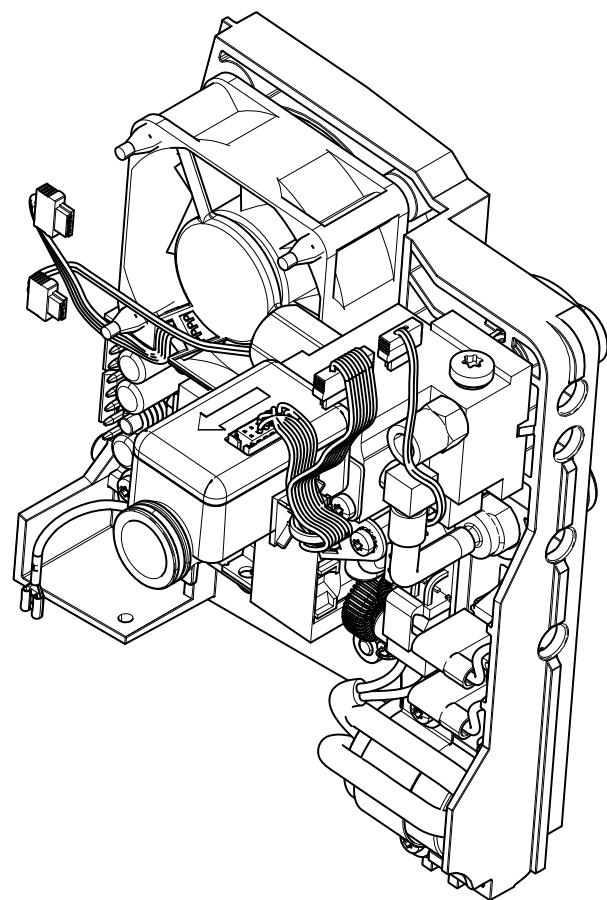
Fan, Power Supply and O2 Mixer Removal/Assembly
